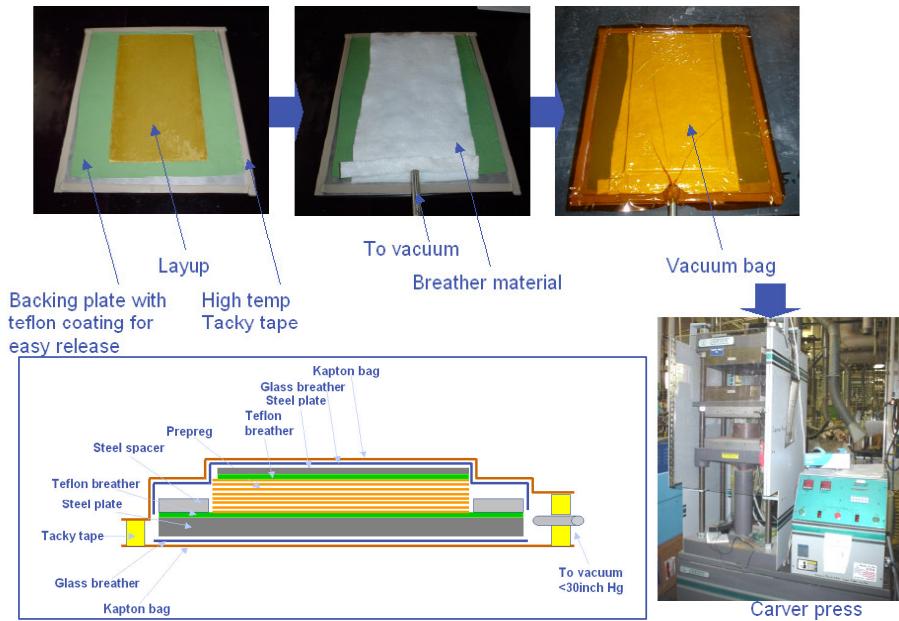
Lay-up and Bagging Sequence for Compression Molding
